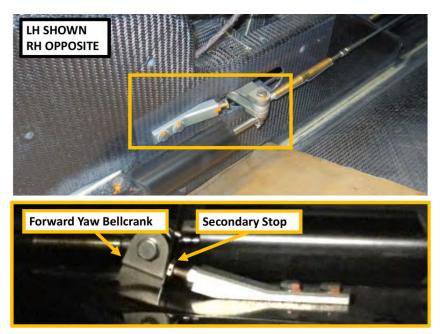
SECONDARY STOP ADJUSTMENT
